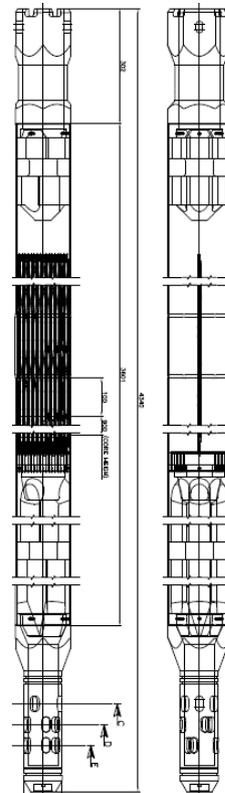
Schematic drawing of a fuel assembly for PGSFR.
